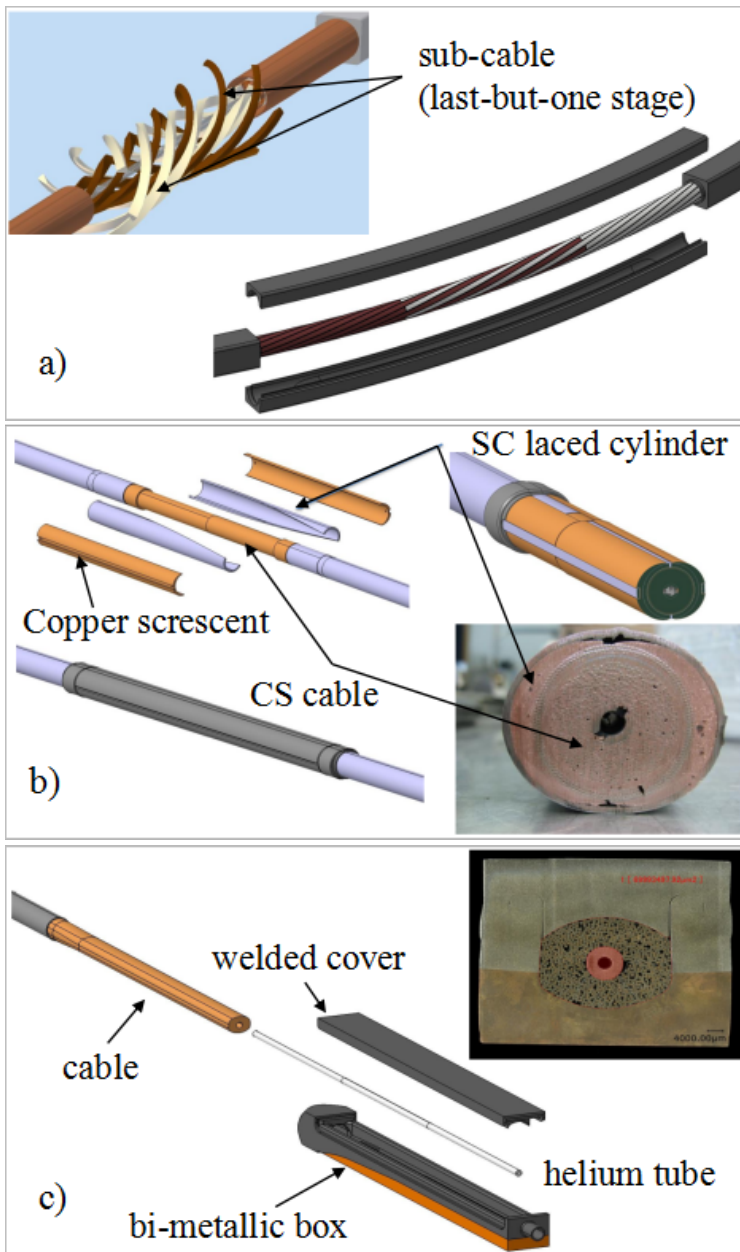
Assembly and cross-section of three types of CS joints: a) sintered joint connecting hexapancakes, b) coaxial joint as bus joint and c) twin box joint as termination joint.
